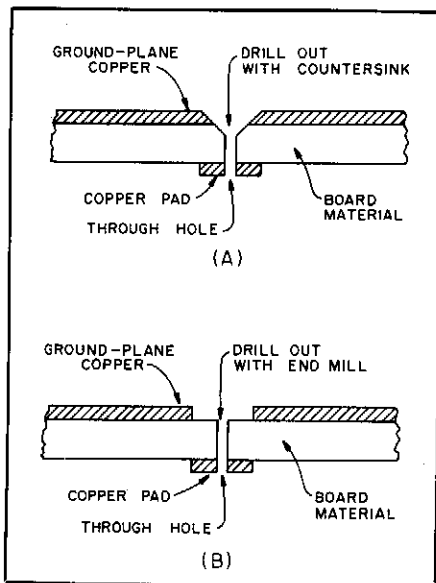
When you use one side of a double-sided PC board as a groundplane, the ground-plane copper must be removed around each through-hole. You can remove the foil with a drill or countersink (A), but overdrilling with these tools can easily ruin the board. An end mill allows removal of foil with little or no damage to the underlying board material (B). Dick Edwin suggests using a homemade end mill; see text.
